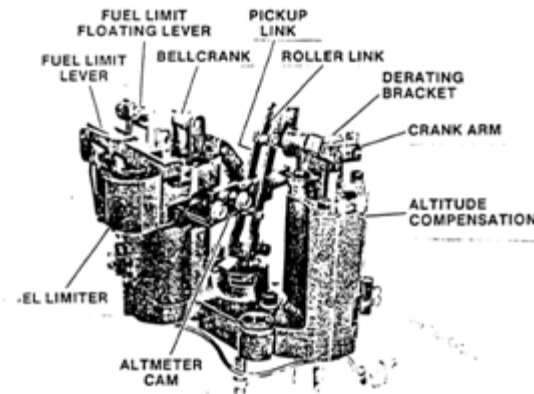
Fuel Limiter/Altitude Compensation Assembly
